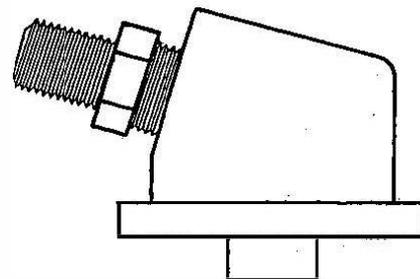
SCHRADER VALVE ASSEMBLY.
